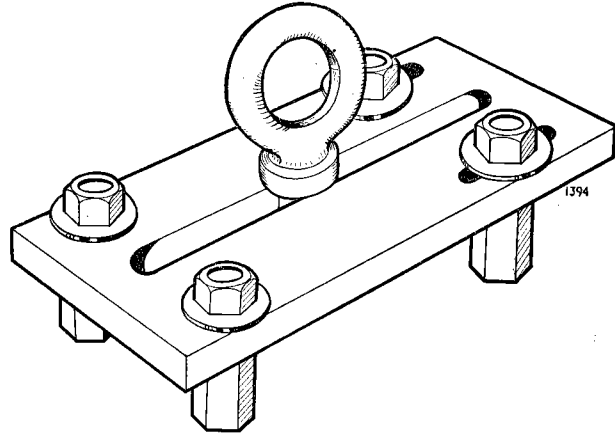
The engine lifting plate (Churchill Tool Number J.8)
